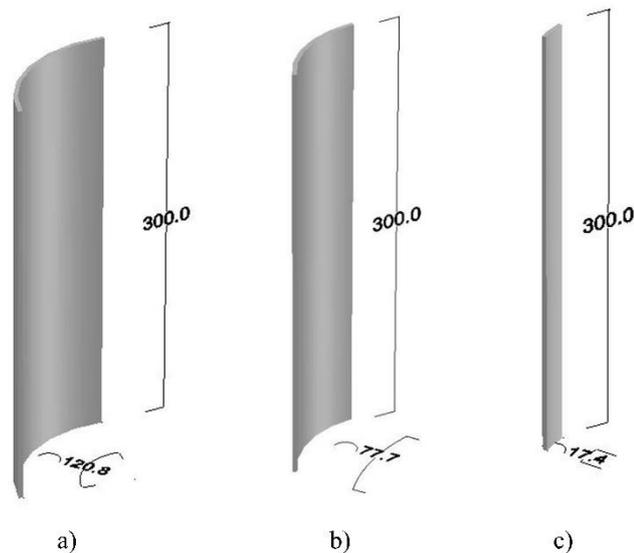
3D drawing of the all the PVC pieces to produce, a) large segment, b) small segment and c) rounded corners, (All units in mm)
